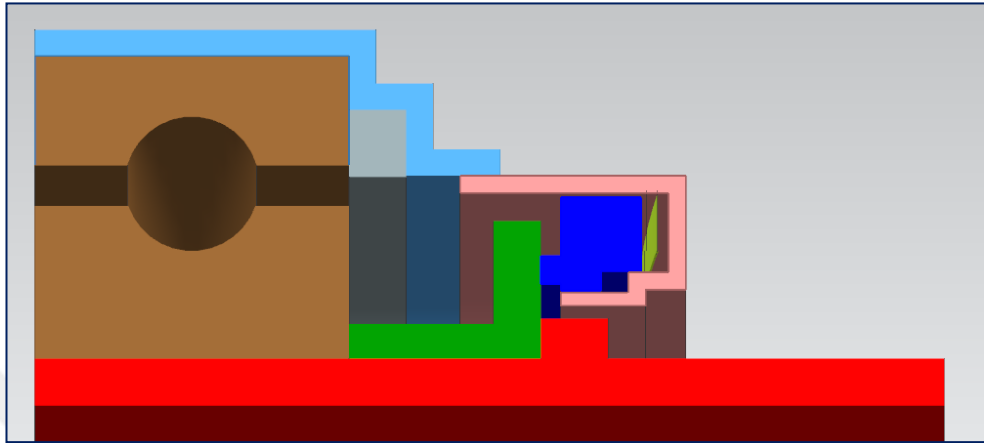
Design Configuration of Carbon Seal for No2 Bearing
